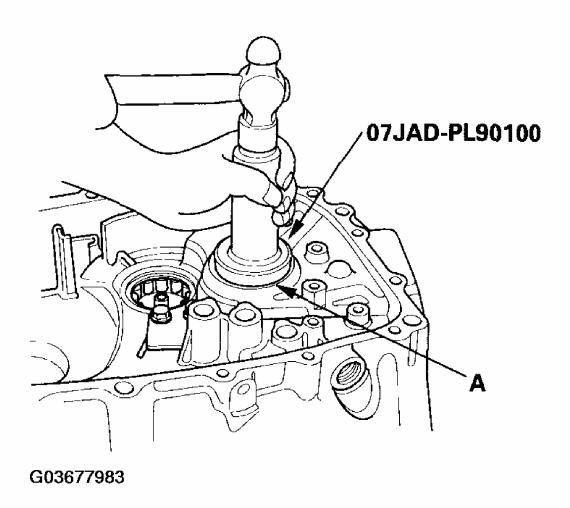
Driving In New Ball Bearing From Transmission Side Courtesy of AMERICAN HONDA MOTOR CO., INC.
